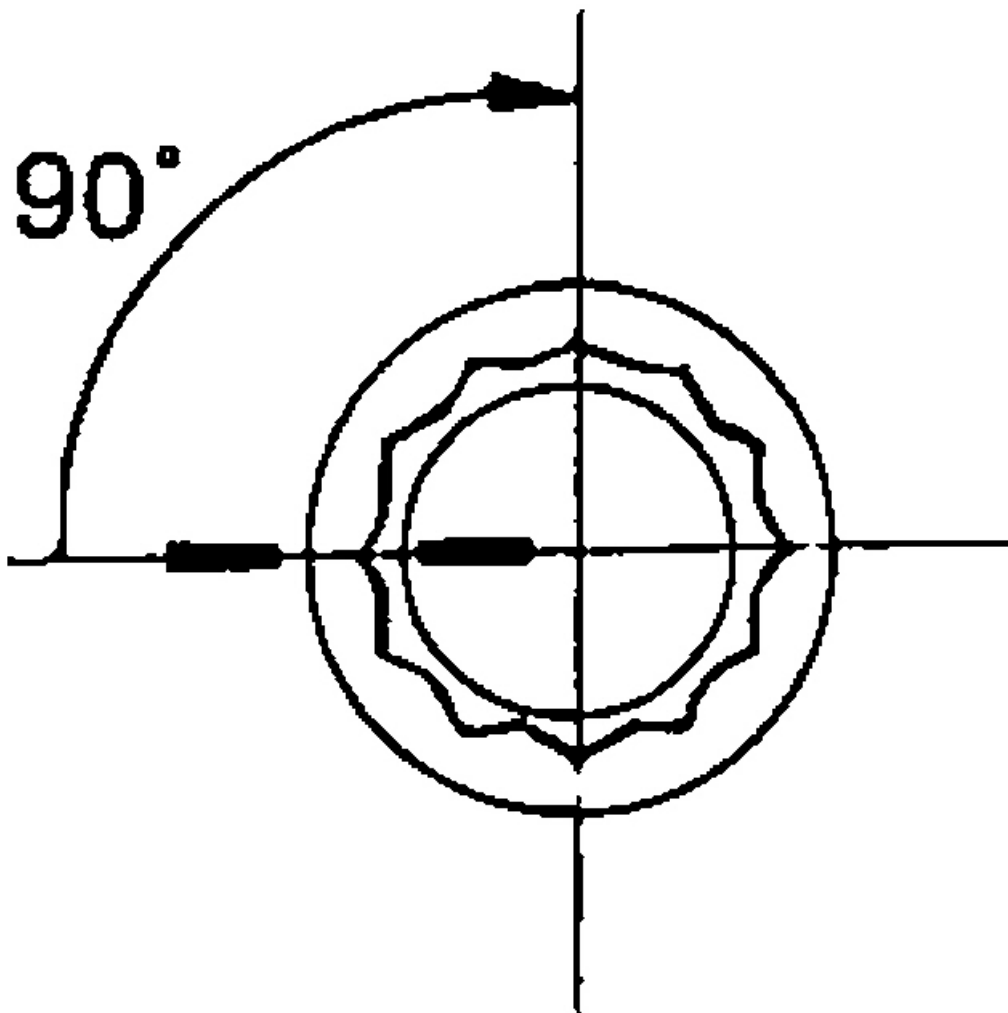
Installing Cylinder Head (With Replacing Head Bolts)
